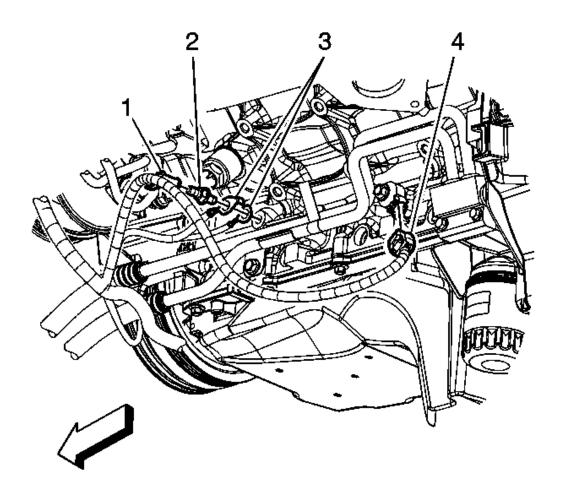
View Of Engine Harness Components Courtesy of GENERAL MOTORS CORP.
